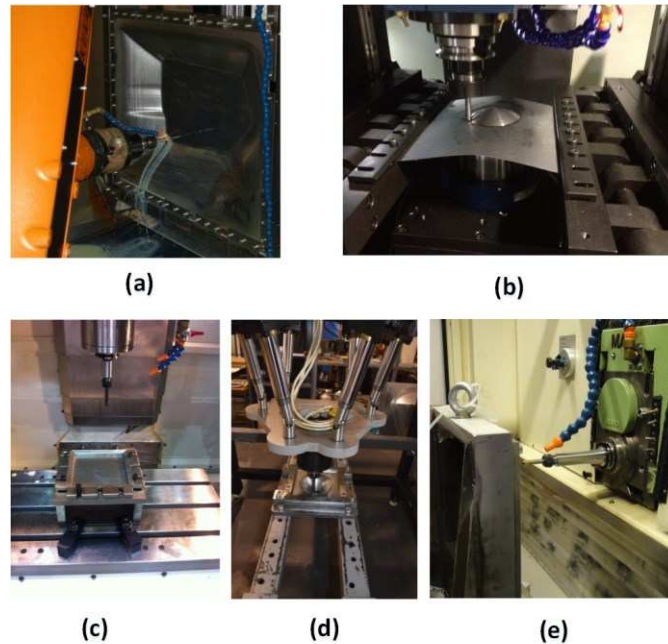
Different hardware setups for incremental forming: (a) KUKA robot [40] (b) forming on a die with sheet clamped on two sides and free on two [20] (c) milling machine with a vertical spindle [14] (d) Stewart platform [4] (e) MAHO 600C milling machine with a horizontal spindle[with permission from publishers]
